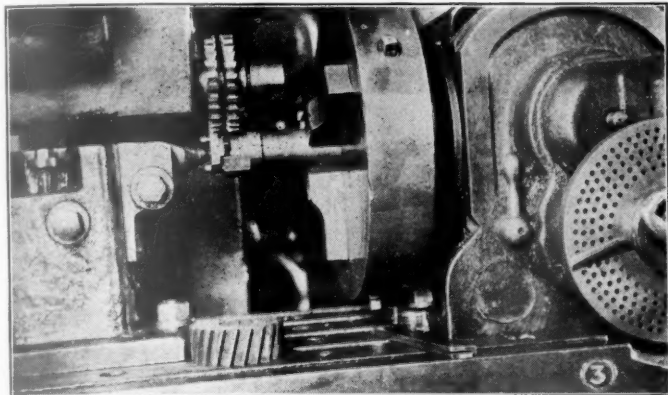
Milling the Cutting Edges of Flue Cutter Knives to Width
